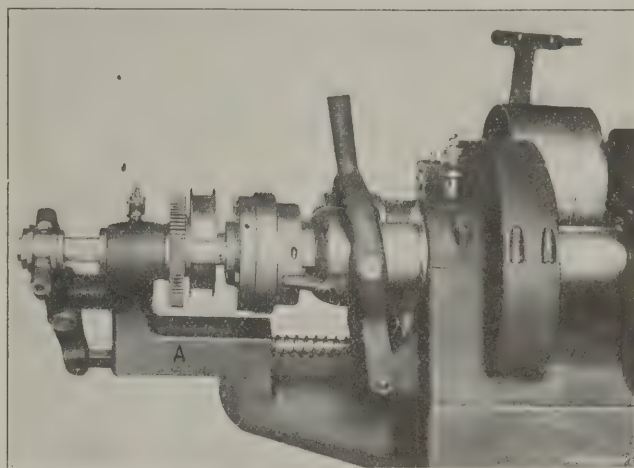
Driving Mechanism for Boring and Back-facing Attachment
